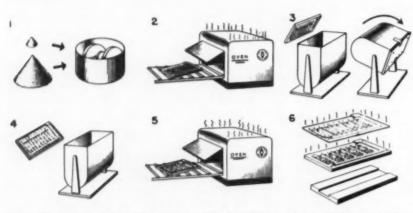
Six basic steps in making a shell mold: (1) material mixing, (2) pattern heating, (3) shell investment, (4) removing pattern and invested shell from dump box, (5) curing the shell, and (6) stripping shell from pattern
